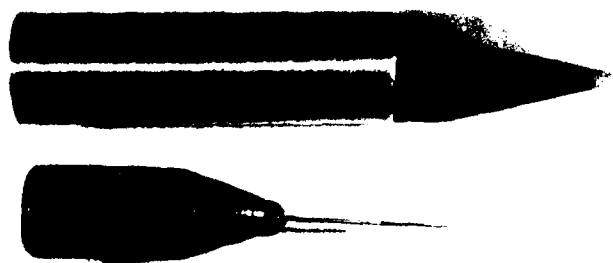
Bond test tools: Shear tool (top), Pull hook (bottom).
